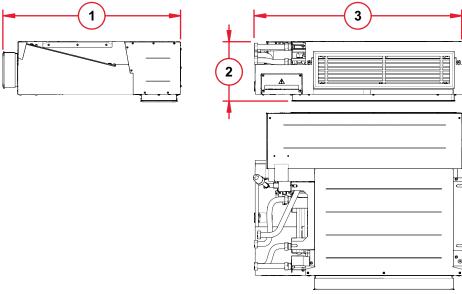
Unit dimensions of BLOCK duct (return air from the bottom)
